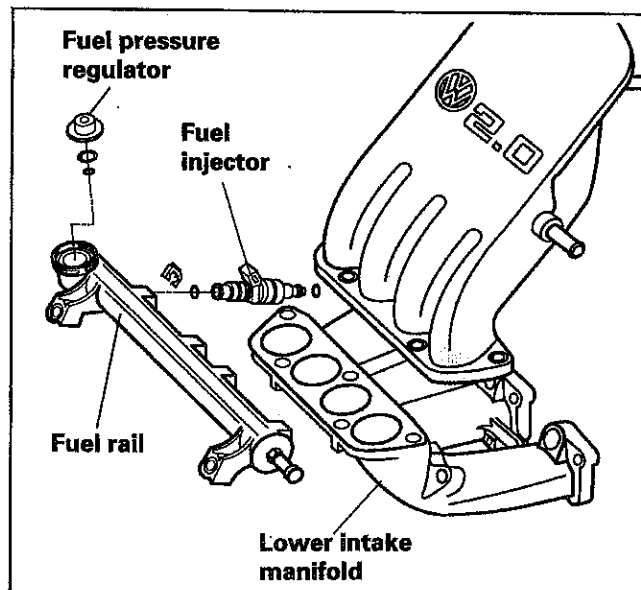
Fuel rail is common fuel supply and mounting for fuel injectors.
